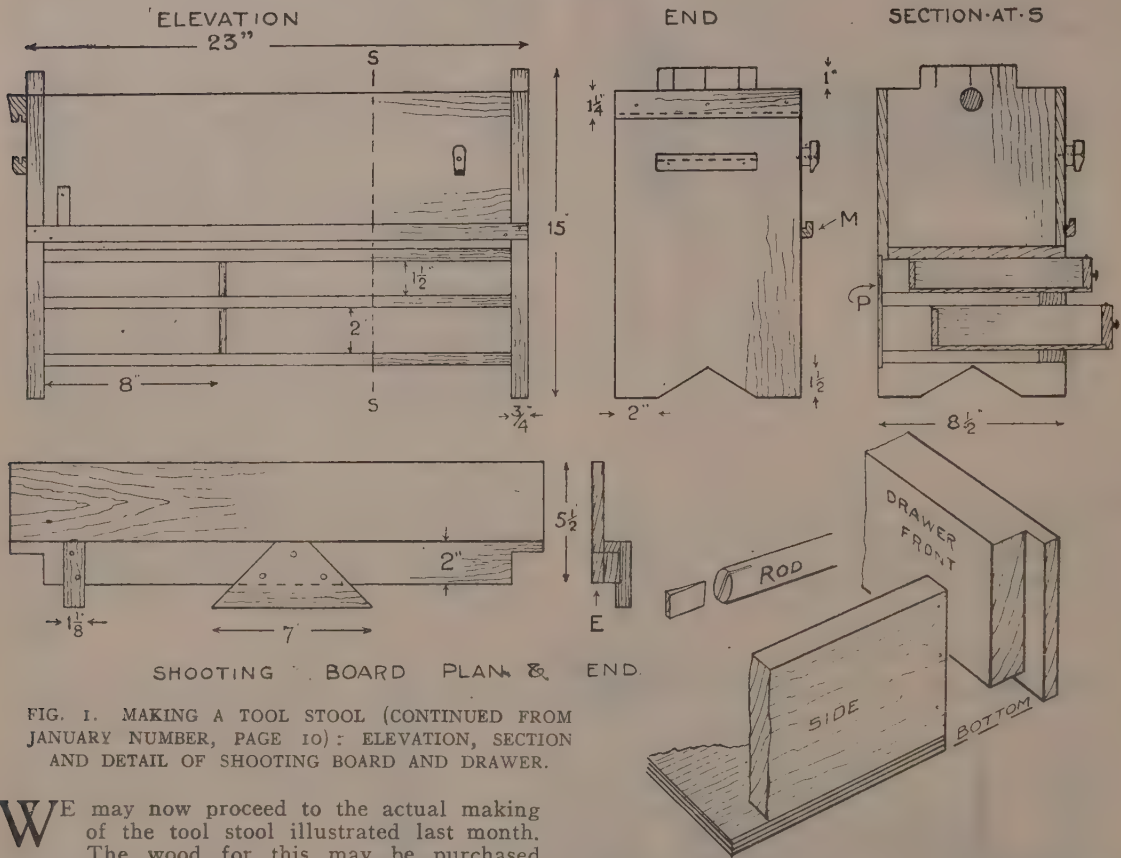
MAKING A TOOL STOOL (CONTINUED FROM JANUARY NUMBER, PAGE 10): ELEVATION, SECTION AND DETAIL OF SHOOTING BOARD AND DRAWER.
